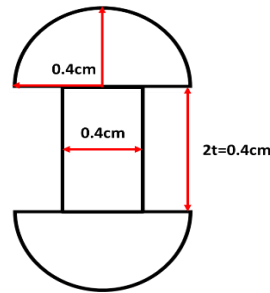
Rivet schematic and dimensions for a rivet shaft diameter of 4mm
